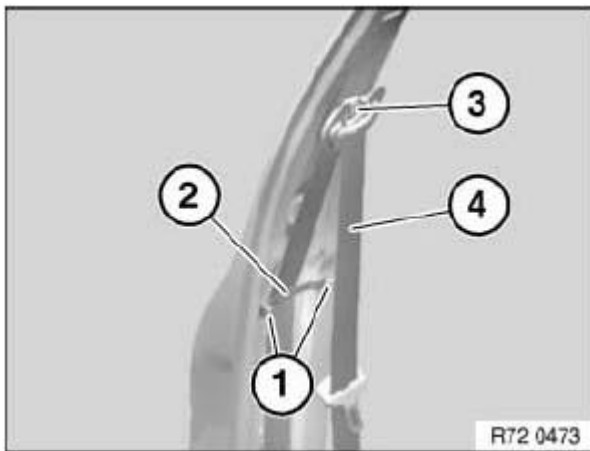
Identifying Screws, Belt Guide, Bolt And Belt
